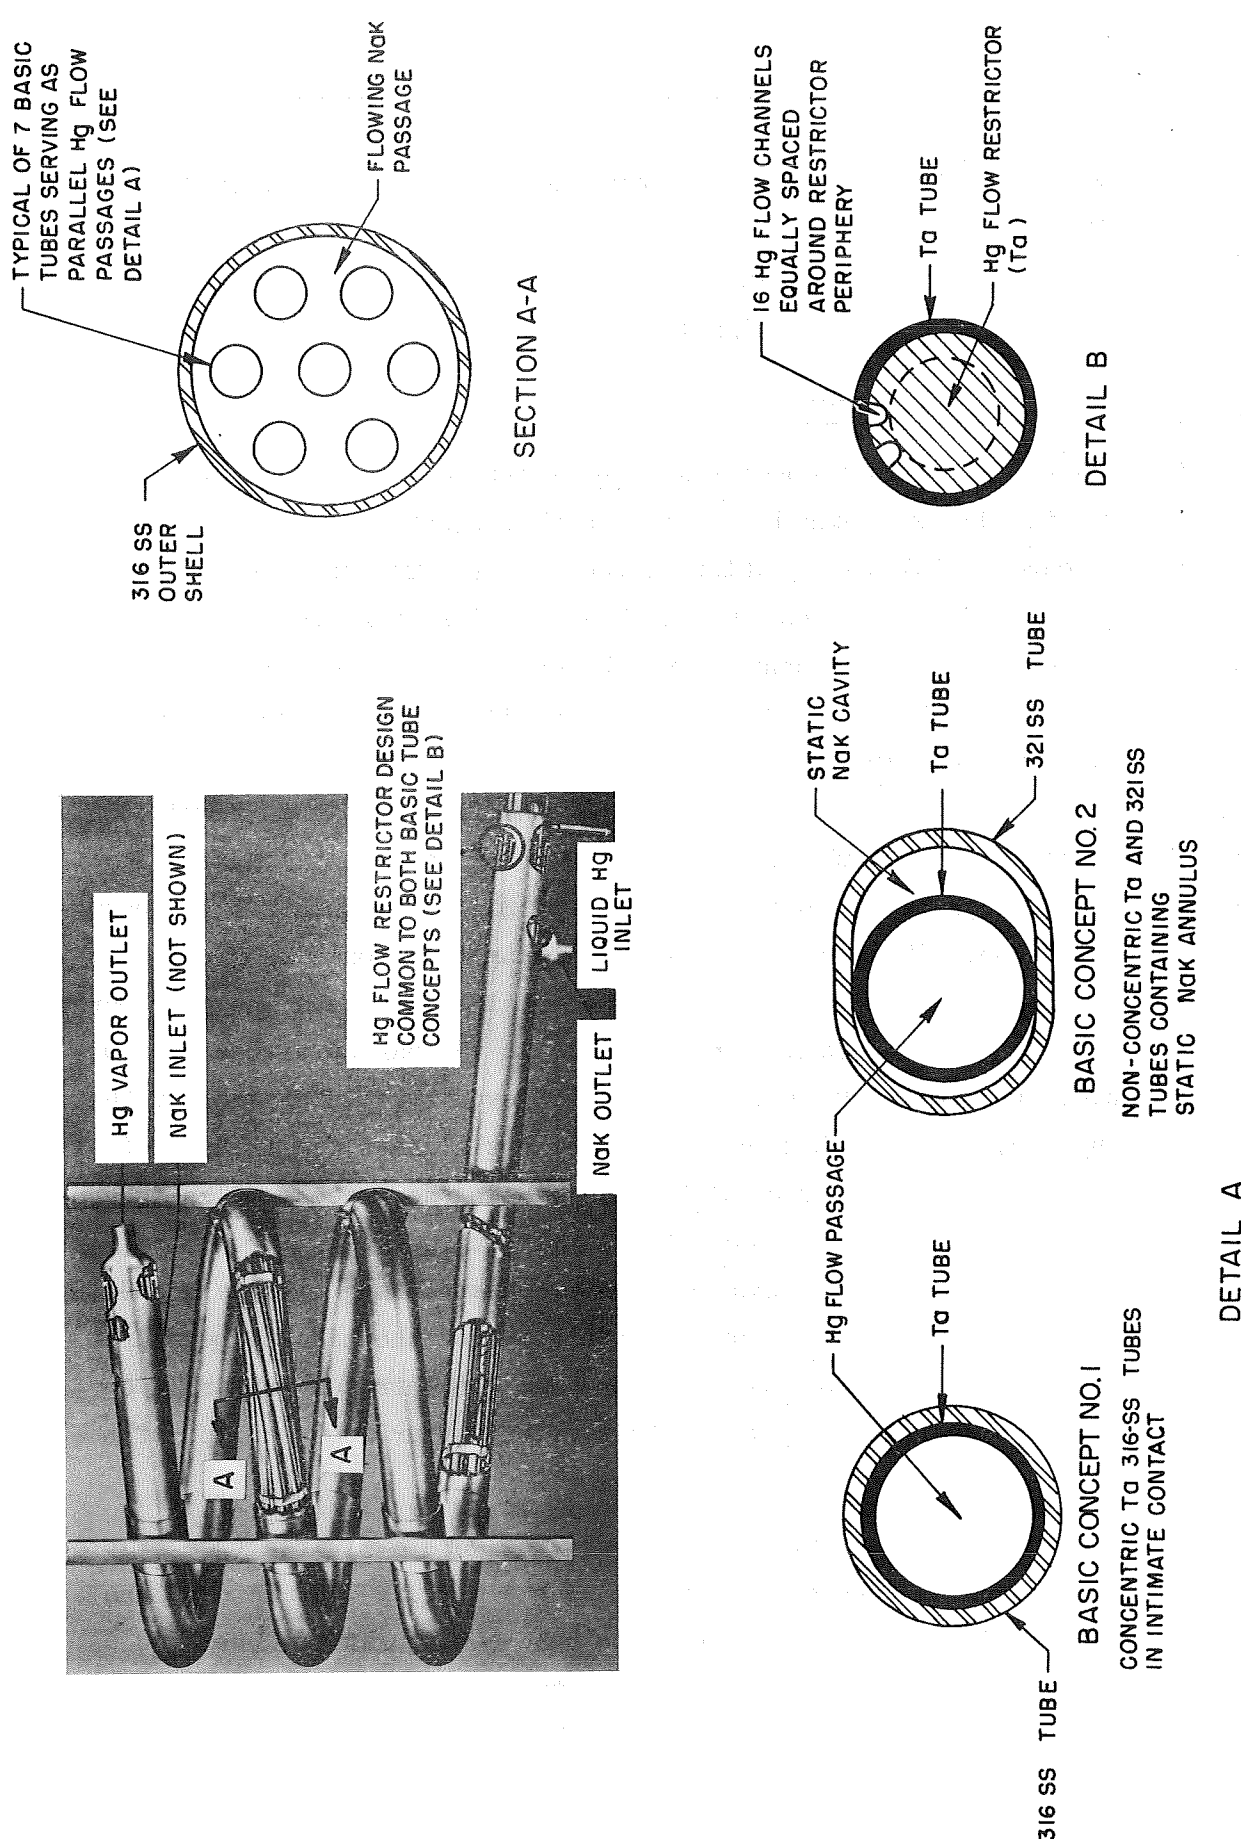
SNAP-8 Boiler Showing Alternate Concepts of Hg Containment Tube Design
